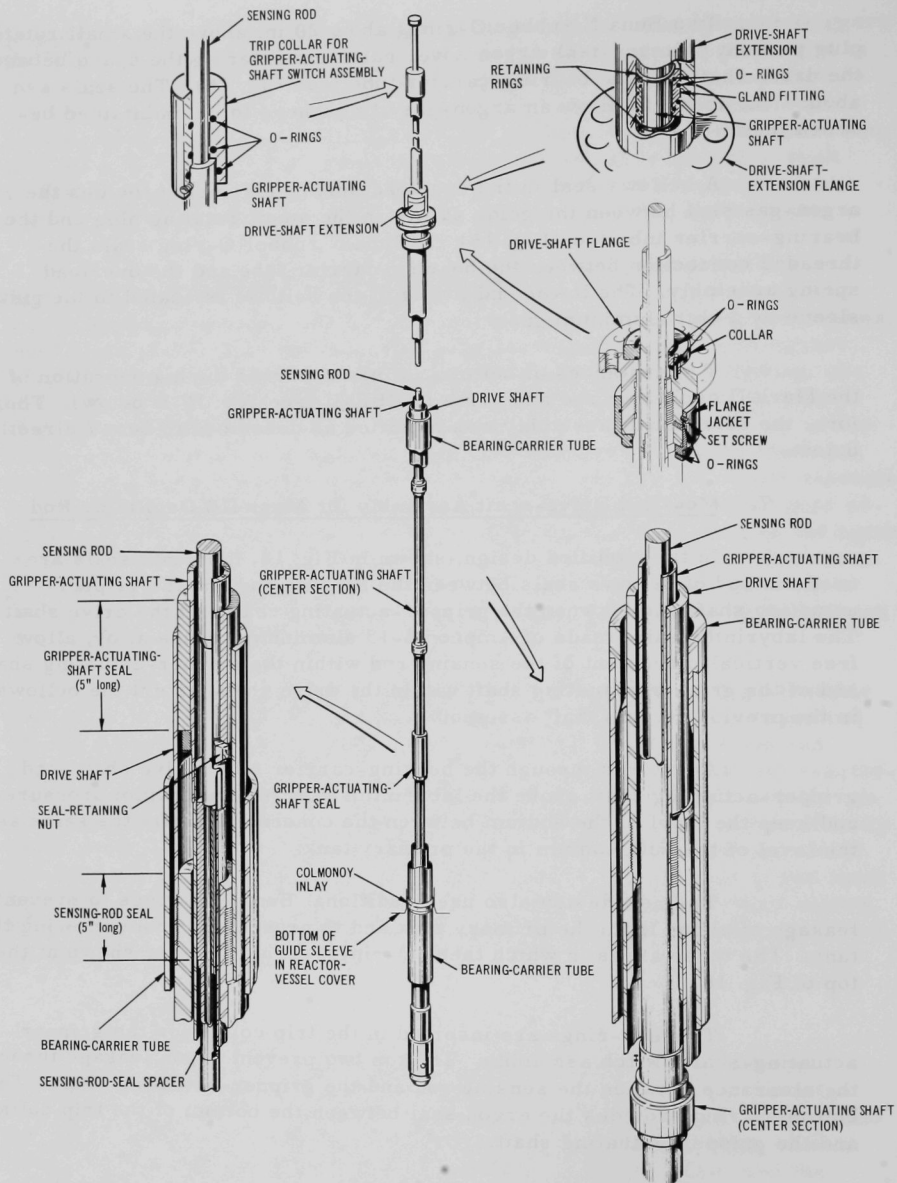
Modified Drive-shaft Assembly for Mark IIB Oscillator Rod
